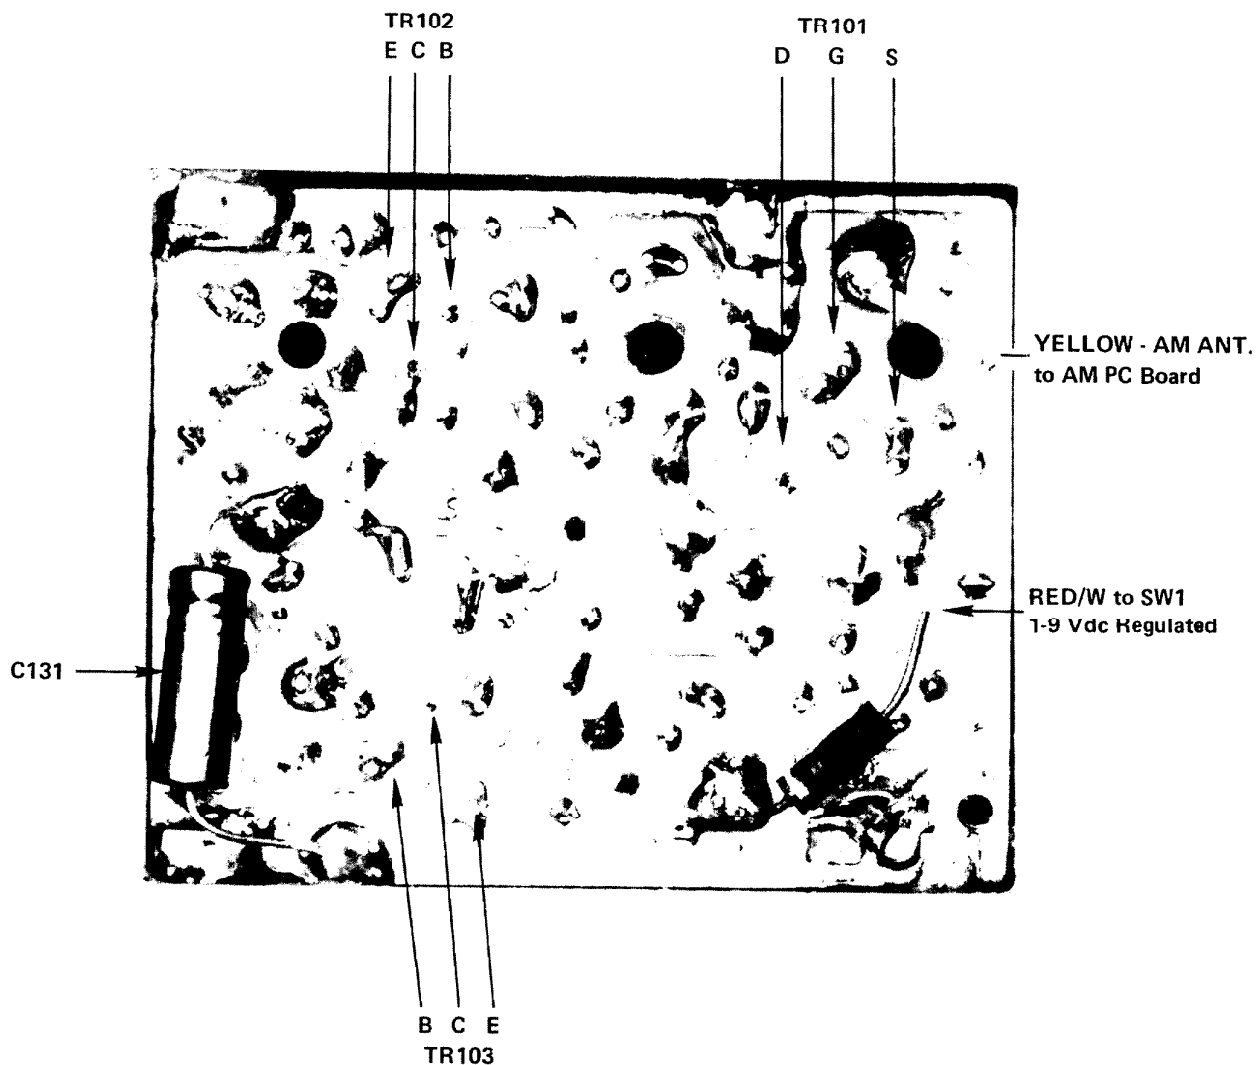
BOTTOM VIEW FM RF PC ASSEMBLY
